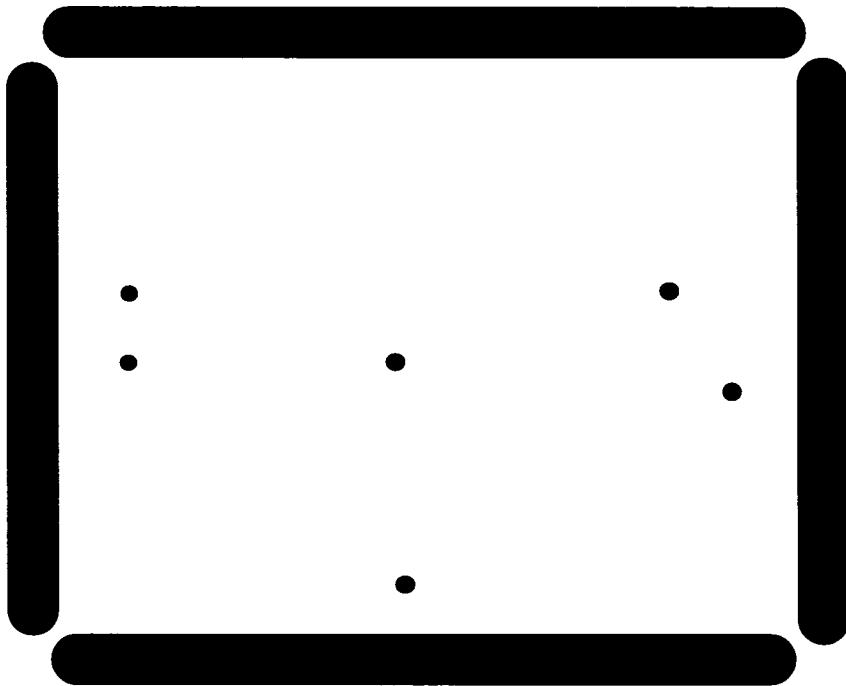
DC/DC converter PCB layout (Drill layer)
